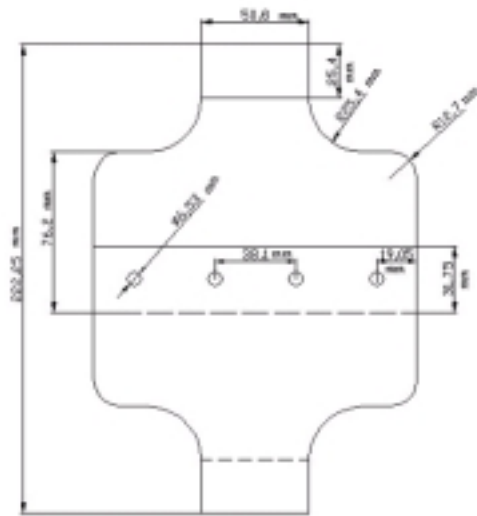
Dimension of specimens, riveted-pitch distance as 38.1 mm
